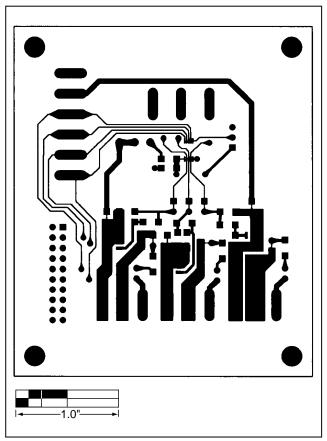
MAX1662 EV Kit PC Board Layout—Component Side
